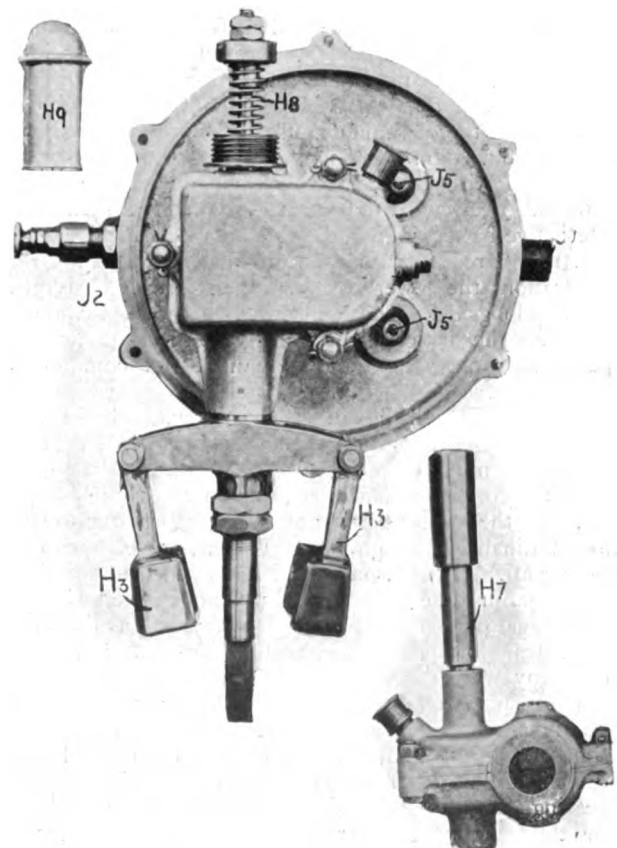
Rear View of the Brotherhood combined Commutator and Distributor, showing the mechanism by which it is driven, the Governor by which it is automatically "timed," and the adjustable Spring for the Governor; the cap that covers the Governor-spring is shown separately to the left, and the lower portion of the driving mechanism (that is mounted about the Cam-shaft) is seen on the right.
